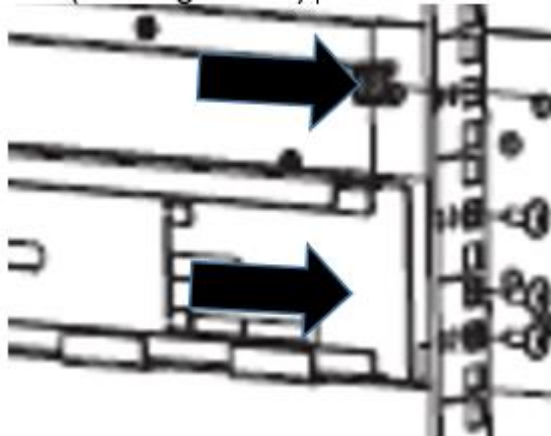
Install Cage Nuts in the Front Equipment Rail with Square Holes
